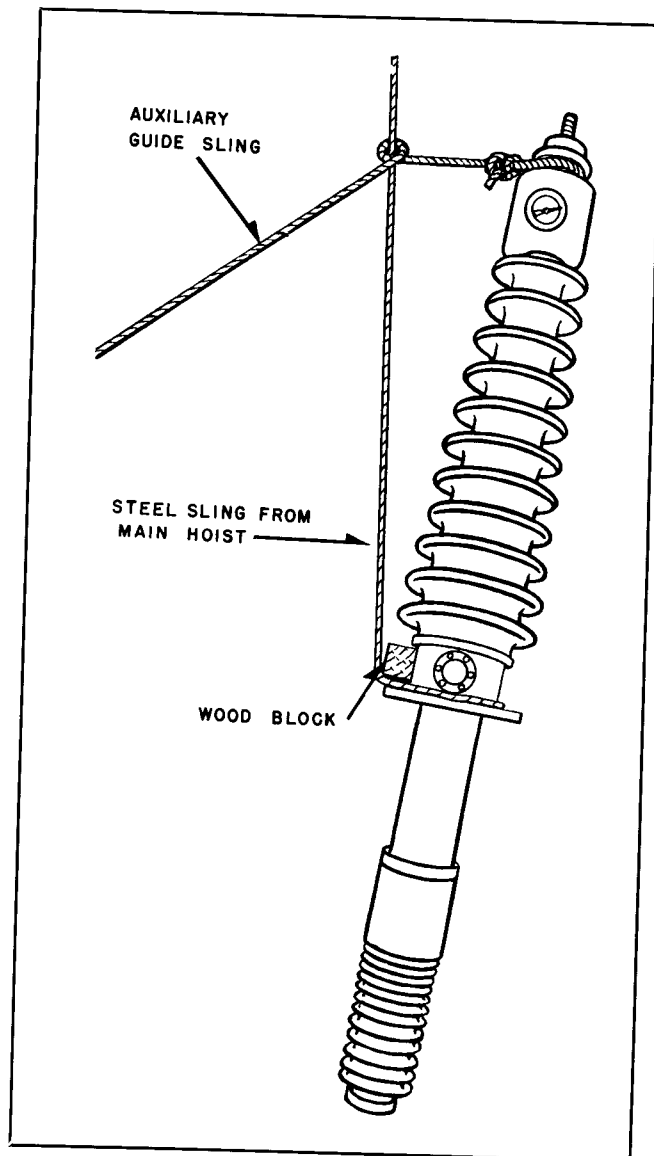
Method of Suspending a Condenser Bushing at Proper Angle for Inserting Into Tank Top
